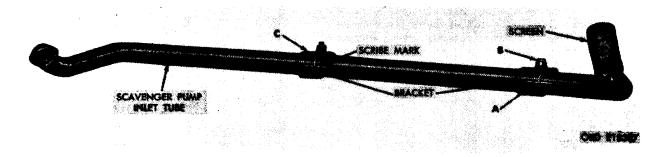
REMOVING OR INSTALLING SCAVENGER OIL PUMP INLET TUBE BRACKETS,
